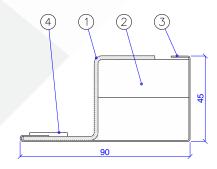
MARC-O60-01.02.00 [Wall stop] 1 – Rail; 2 – Rail union; 3 – Fascia installation profile
